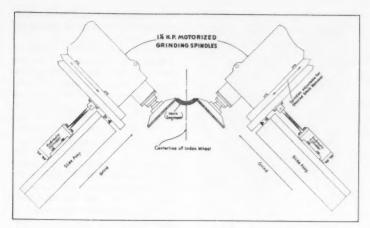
Diagram illustrating action of hydraulically actuated paired grinding heads of machine shown in Fig. 1
